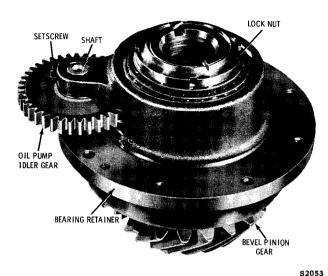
Bevel pinion gear, bearing retainer and oil pump idler gear, assembled (VH, VSI series)
